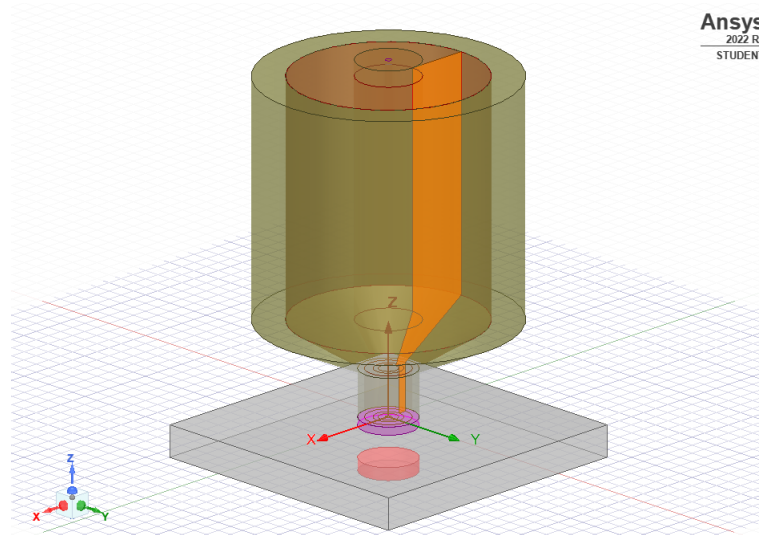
3D MR-finishing tool with permanent magnet placed beneath the workpiece
